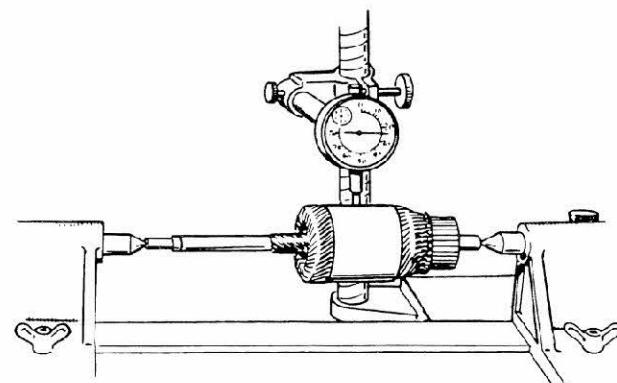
CHECKING ARMATURE SHAFT RUNOUT
